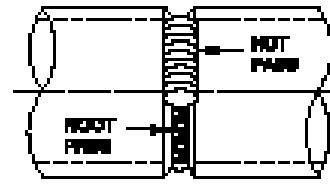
Hot Pass (Welding Sequence)
